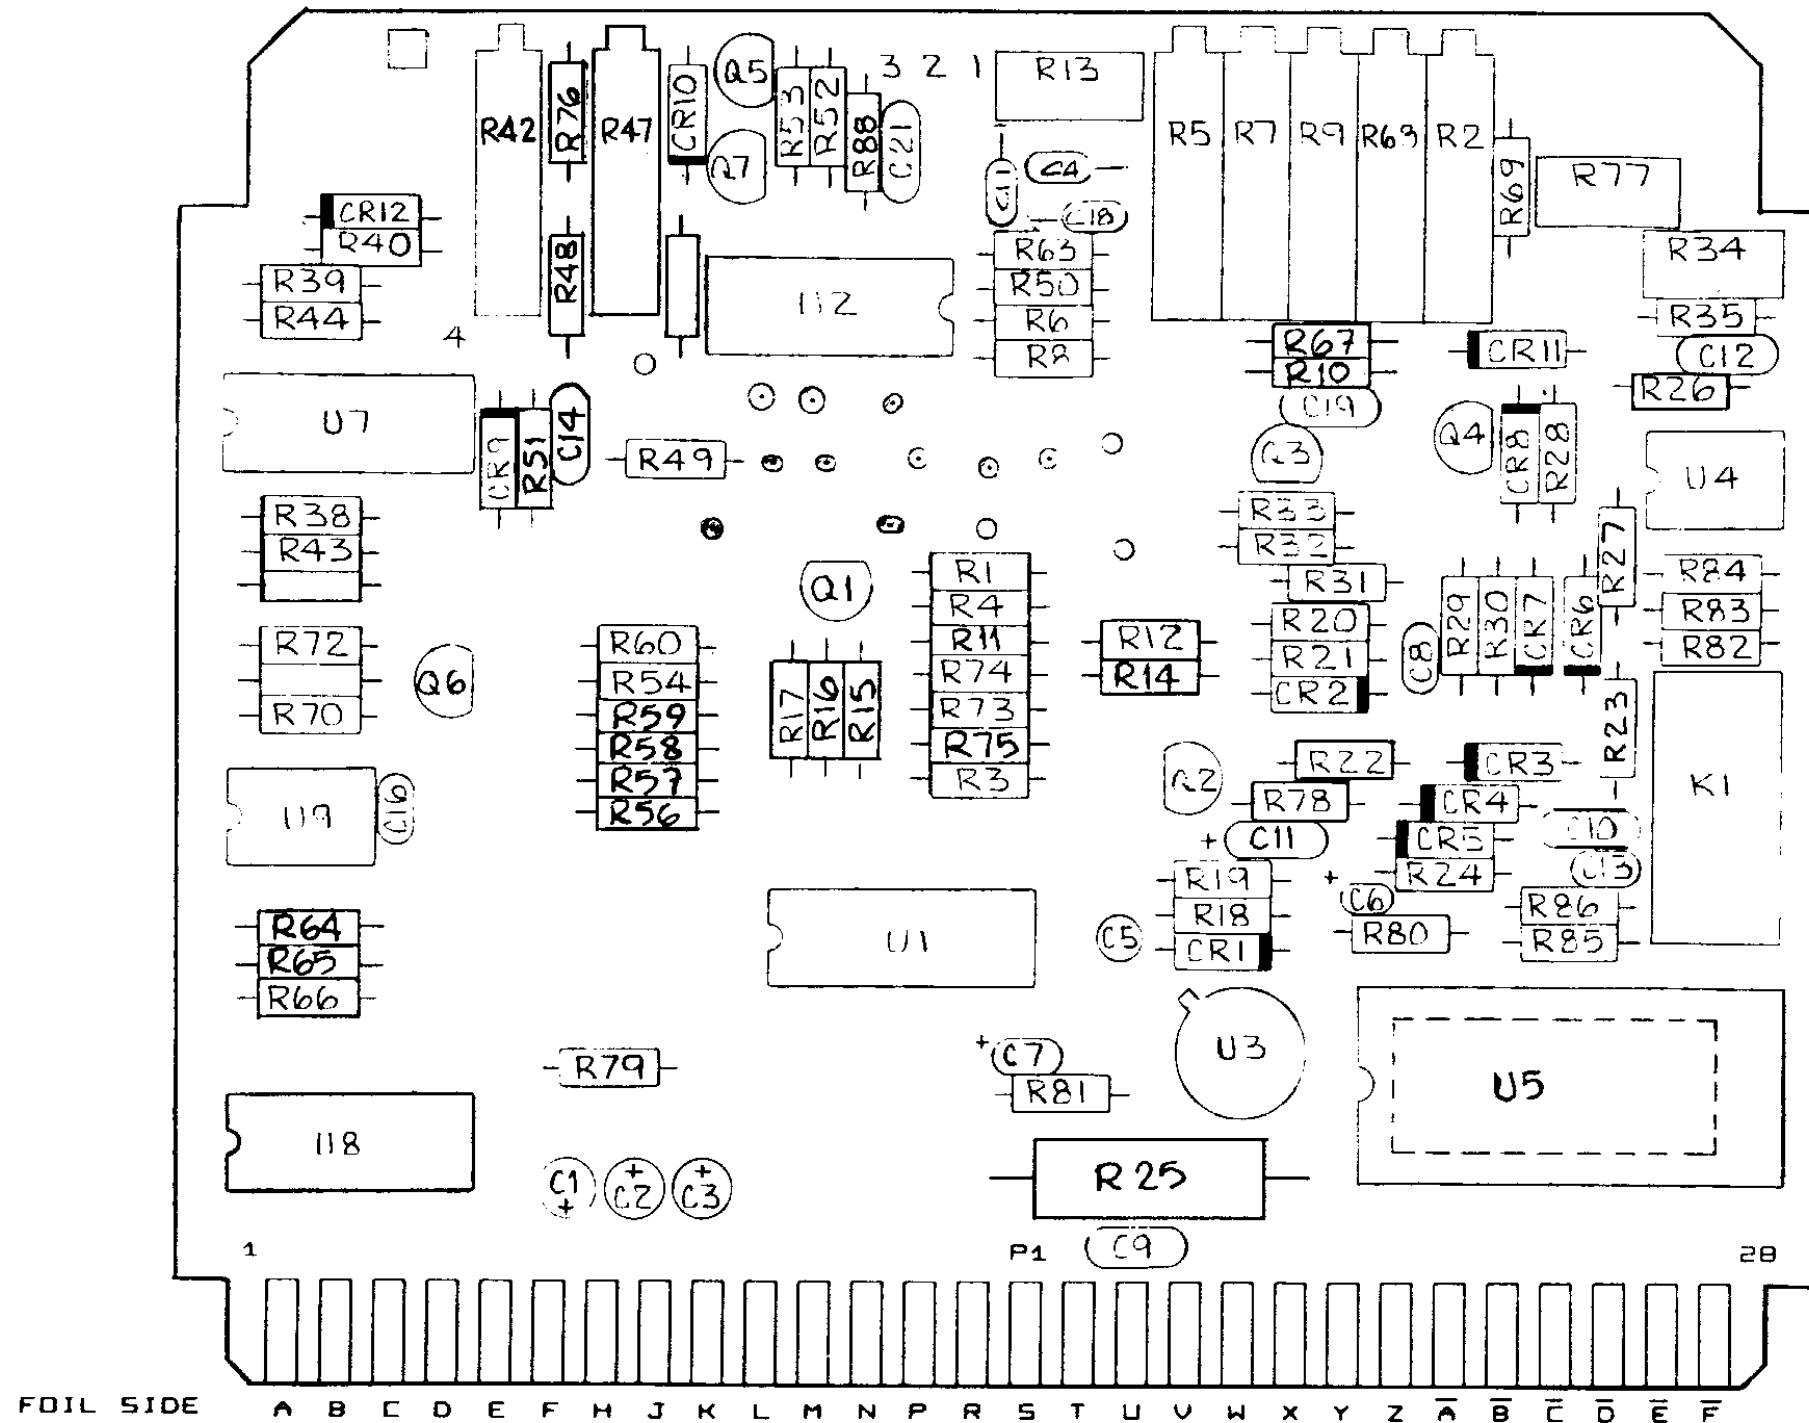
A1A7 YIG Driver PCB Parts Locator, Assy D8009-15, 39
